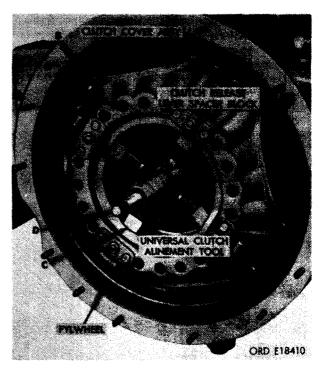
INSTALLING CLUTCH DRIVEN MEMBER USING UNIVERSAL CLUTCH ALINEMENT TOOL. (2) Figure 484. (A) Position clutch cover assembly against driven member and aline screw holes in clutch cover with holes in flywheel. (B) Secure clutch cover assembly to flywheel using eight 3/8-inch lock washers and 3/8 x 15/16 cap screws. (C) Depress clutch release levers and remove the four clutch release lever spacers. (D) Remove the universal clutch alinement tool.
